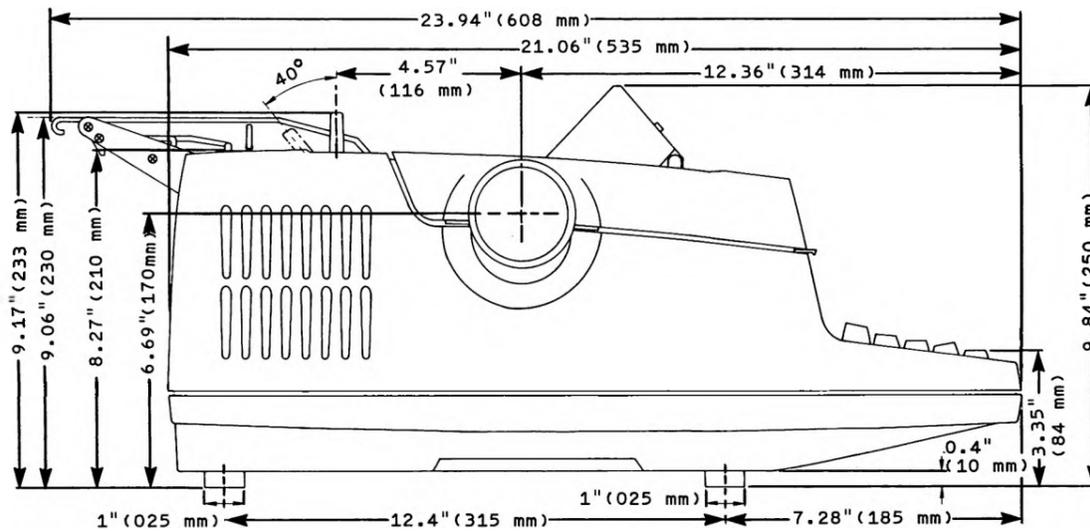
Models 5520 and 5525 SPINWRITER Dimensions, Left Side View
